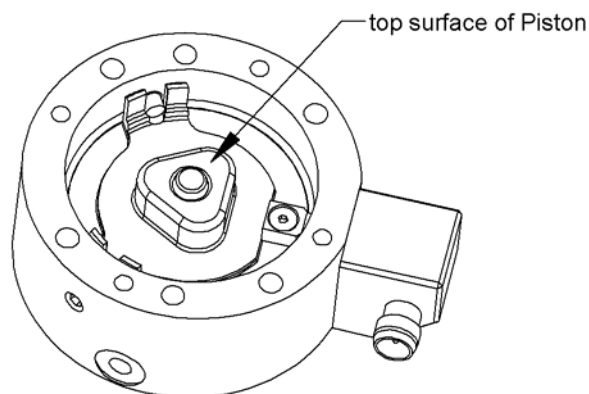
Cleaning and Re-lubricating Top Surface of Piston
